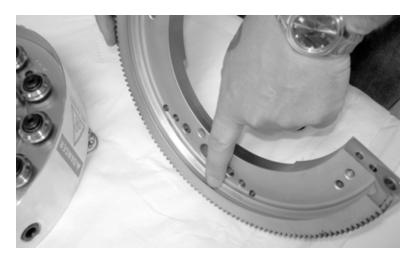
Inspect the "V" groove of the rotating ring for wear or damage.
